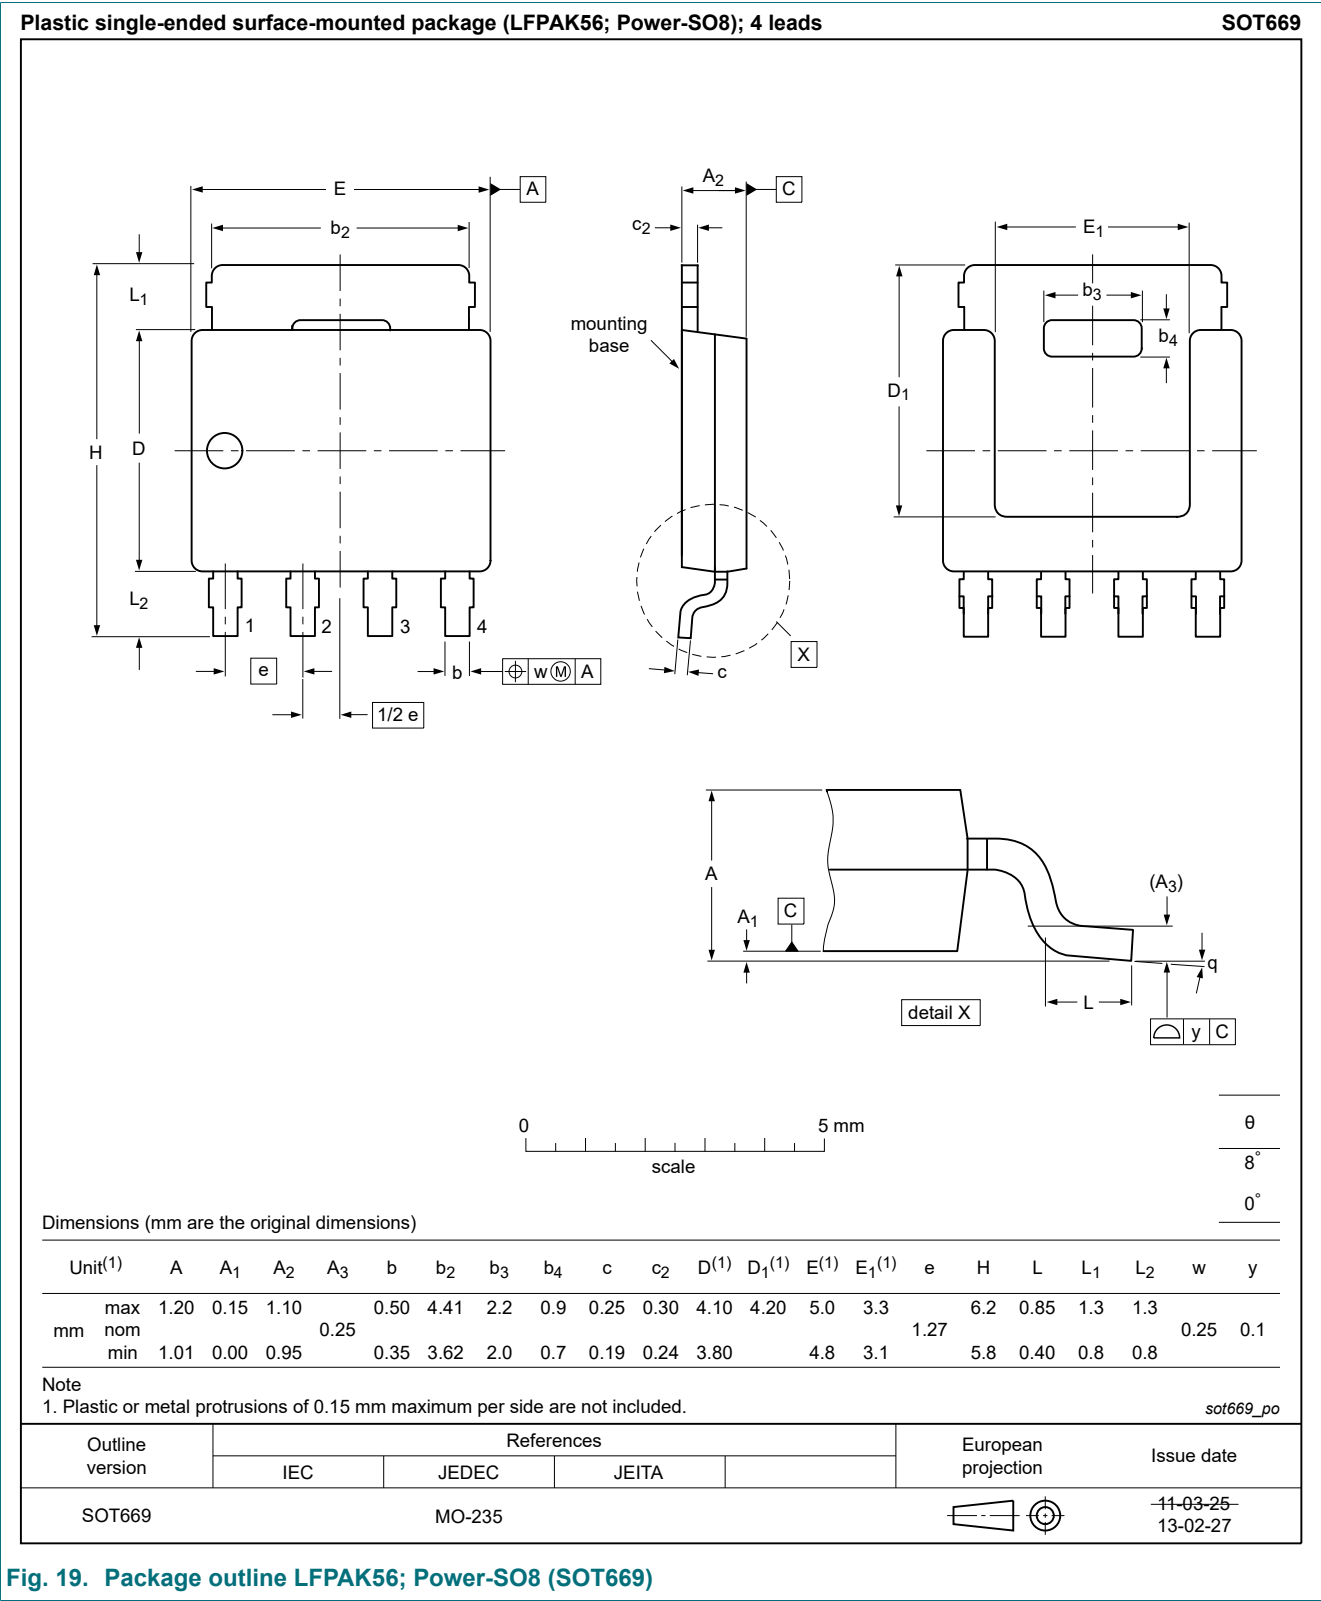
Package outline LPAK56; Power-SO8 (SOT669)
